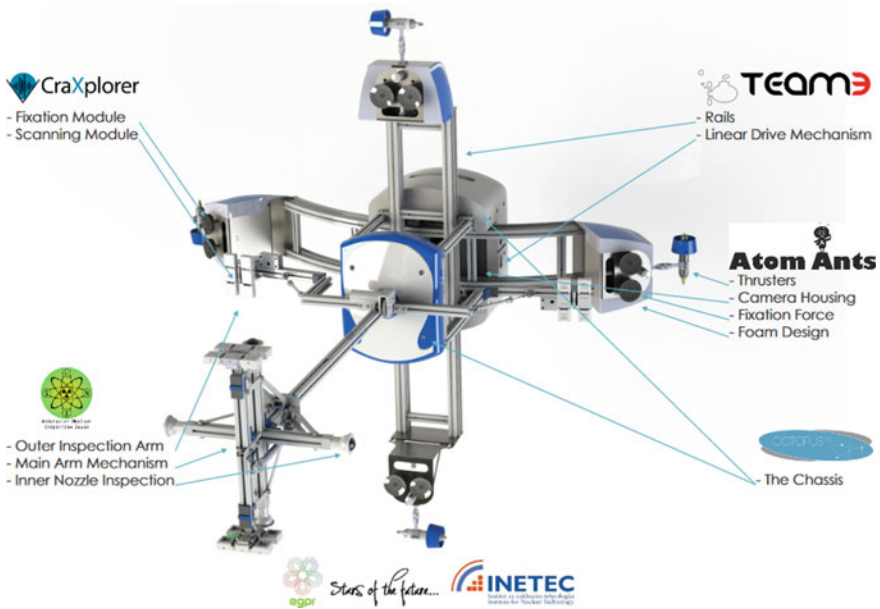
Remotely operated device for inspecting welds in nuclear reactors, Zagreb, 2015
